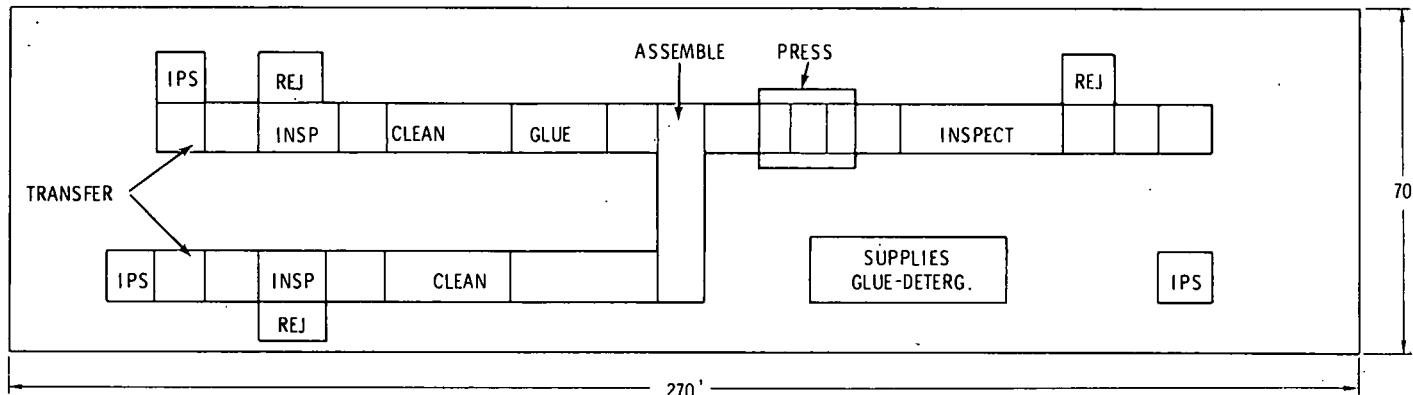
PLANT LAYOUT MIRROR MODULE ASSEMBLY LINE
